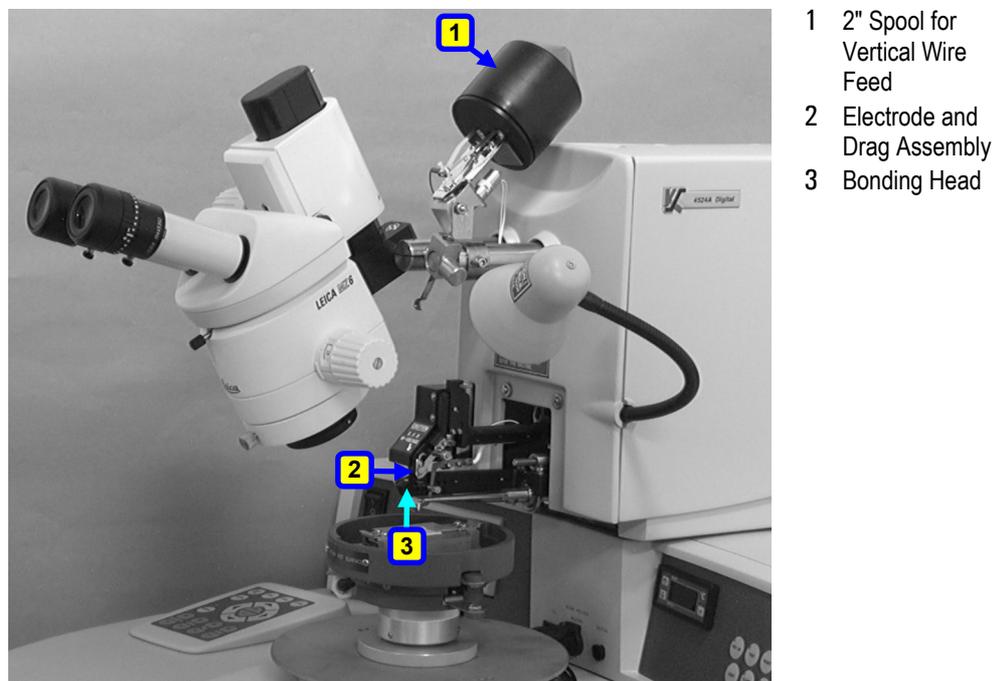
The Main Head Assembly - 4524D, 4524AD
